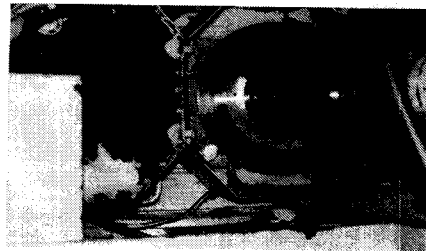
Diamond wheel, Electrode, Grinding Fluid Supply Unit
